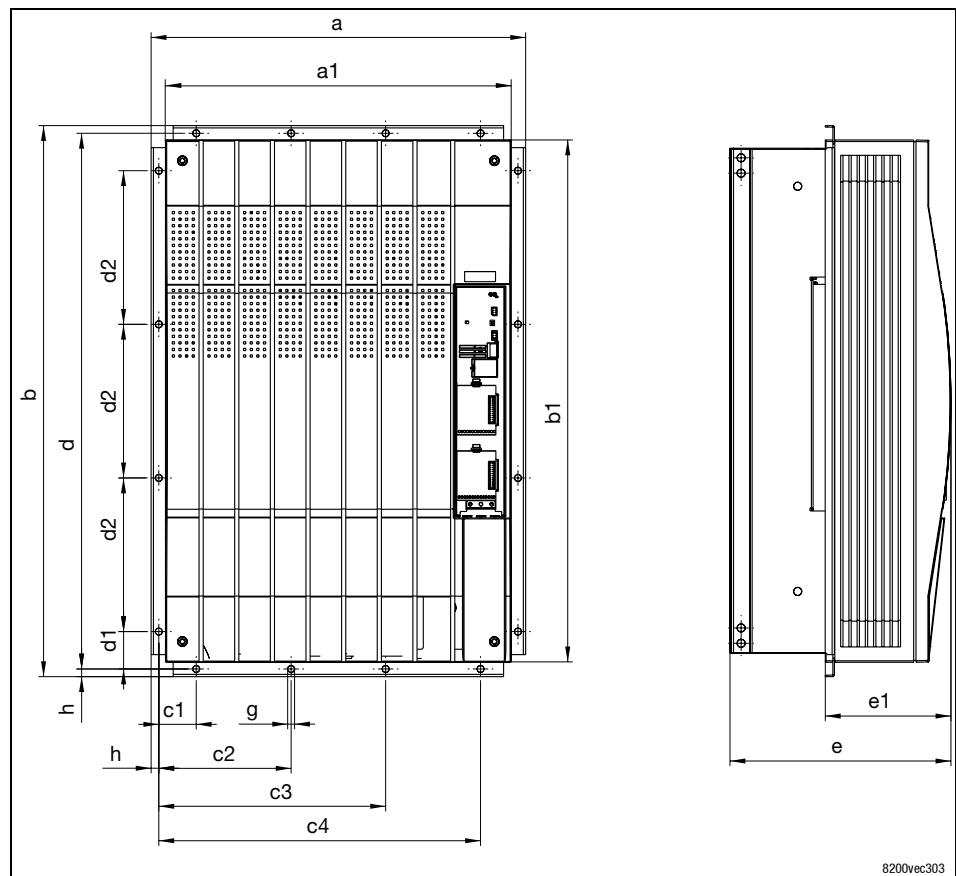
Dimensions for thermally separated mounting 75 ... 90 kW
